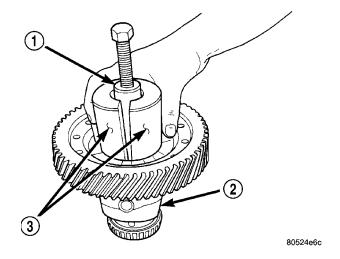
Position Tool 5048 Over Button and Collets at Differential Bearing (Ring Gear Side)
